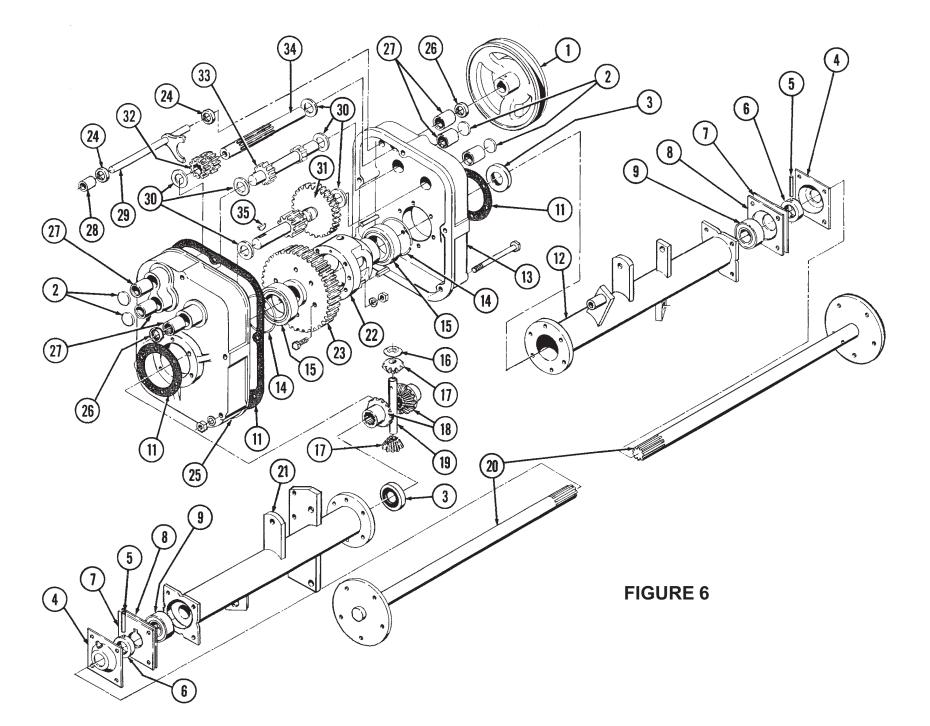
DIFFERENTIAL & REAR AXLE
